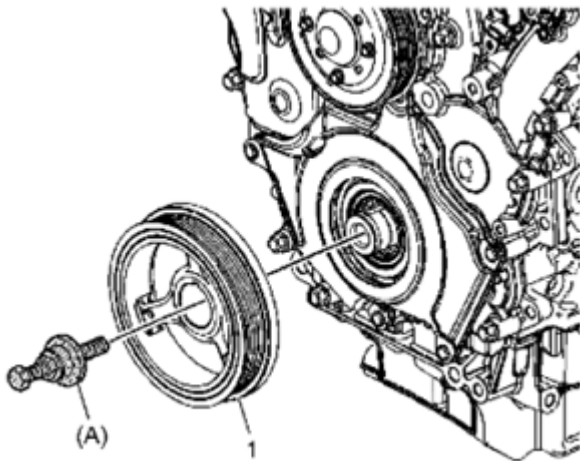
Applying Engine Oil Between Crankshaft Pulley And Crankshaft
